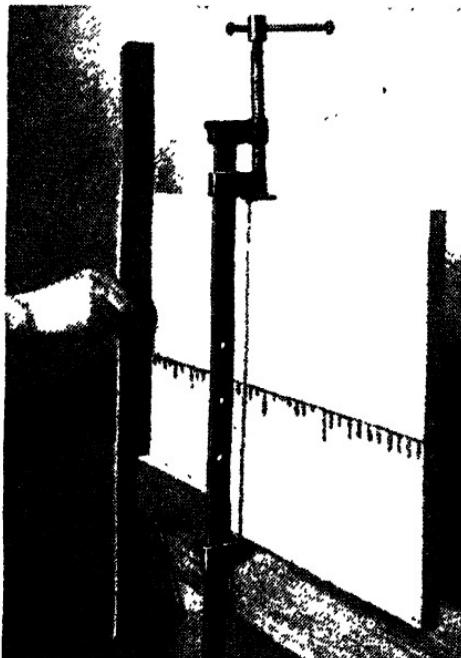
TESTING CRAMPED JOINT WITH STRAIGHT-EDGE.
